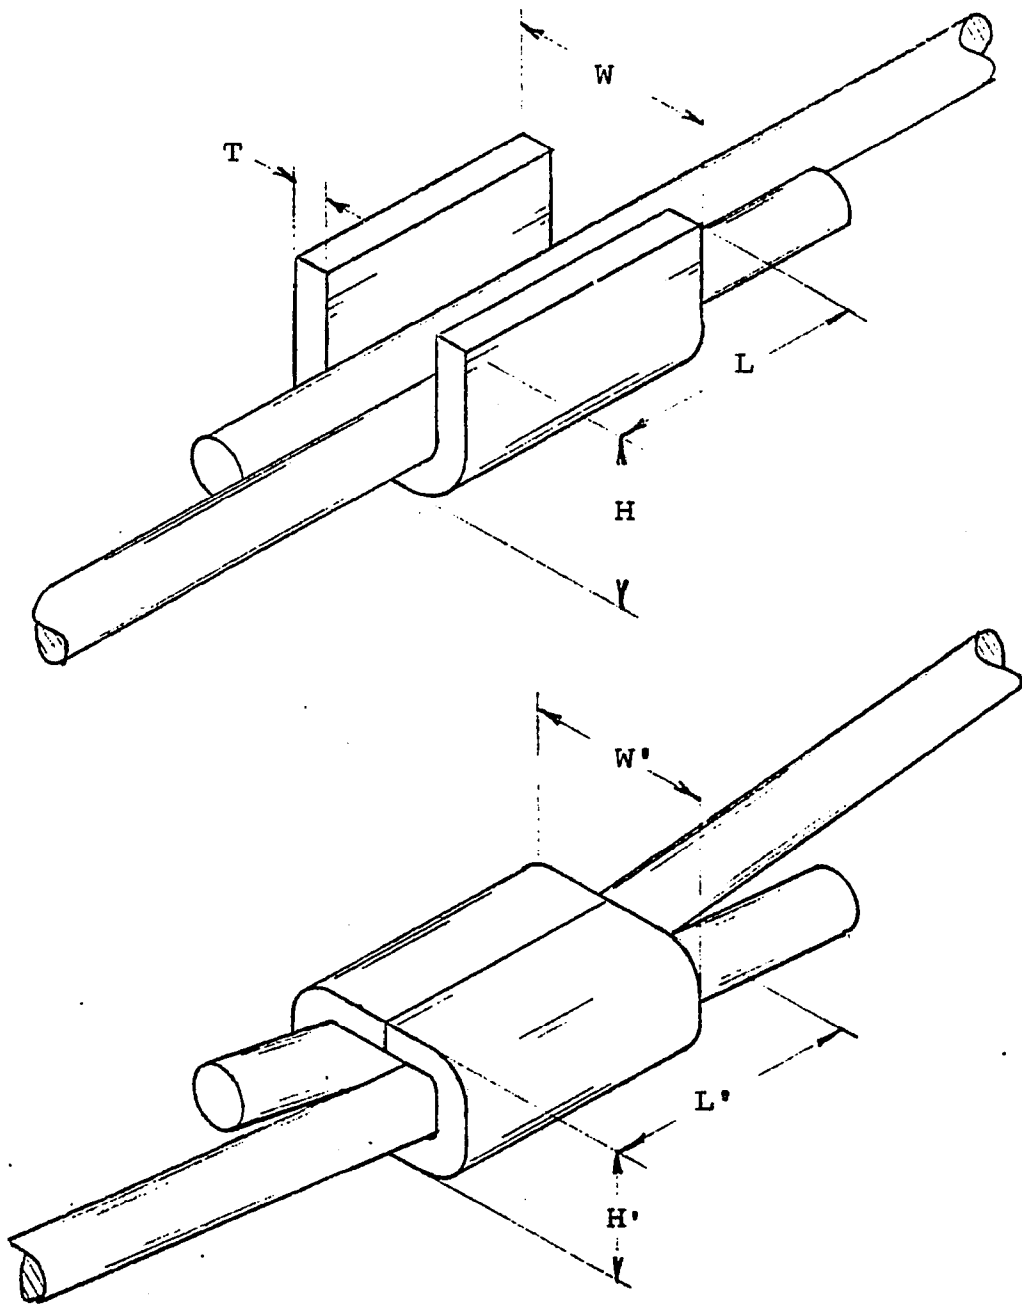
Open-seam U-shaped Connector Used in the Test
